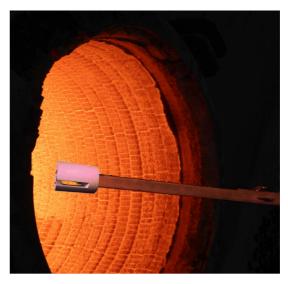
New developed lasermeasurement system with immersed laserhead into a ladle
